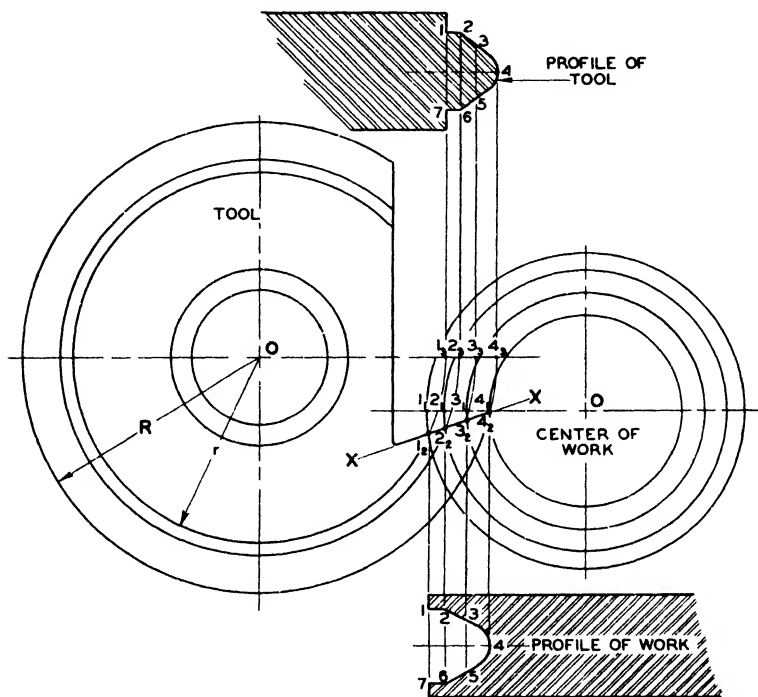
Layout for a Circular Forming Tool with Positive Back Rake
